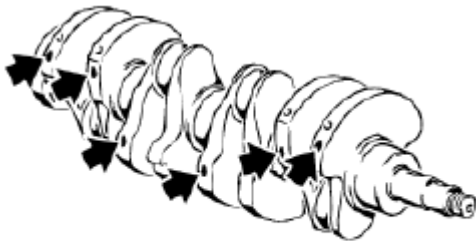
Identifying Crankshaft Tolerance Of Main Journal
